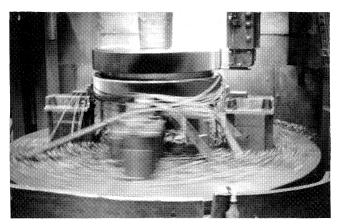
Gear Being Machined for the Modified Design Center Groove Addition.
